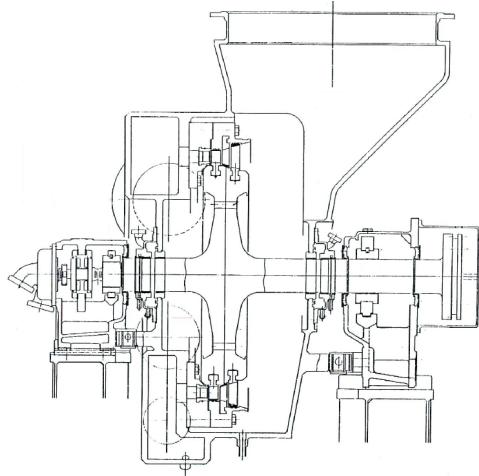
Sectional drawing of Svartsengi Unit 3 turbine.
